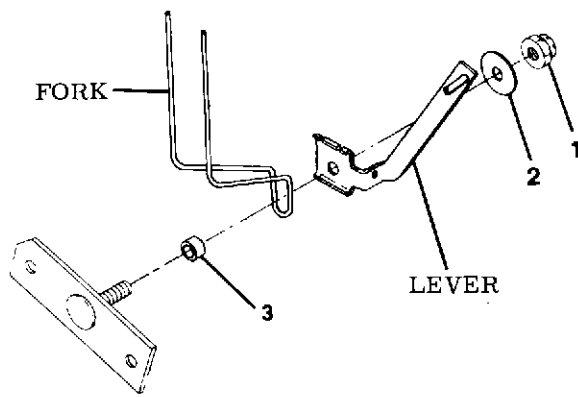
REASSEMBLY OF DRIVE BELT SHIFT FORK ASSEMBLY
